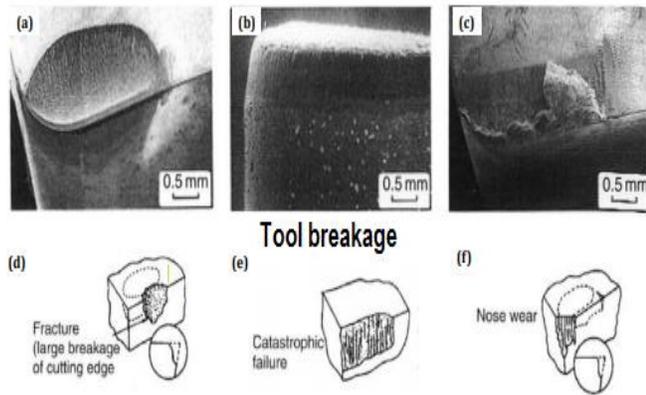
Damage due to wear (a-b-c) and breakage (d-e-f) of a cutting tool according.
